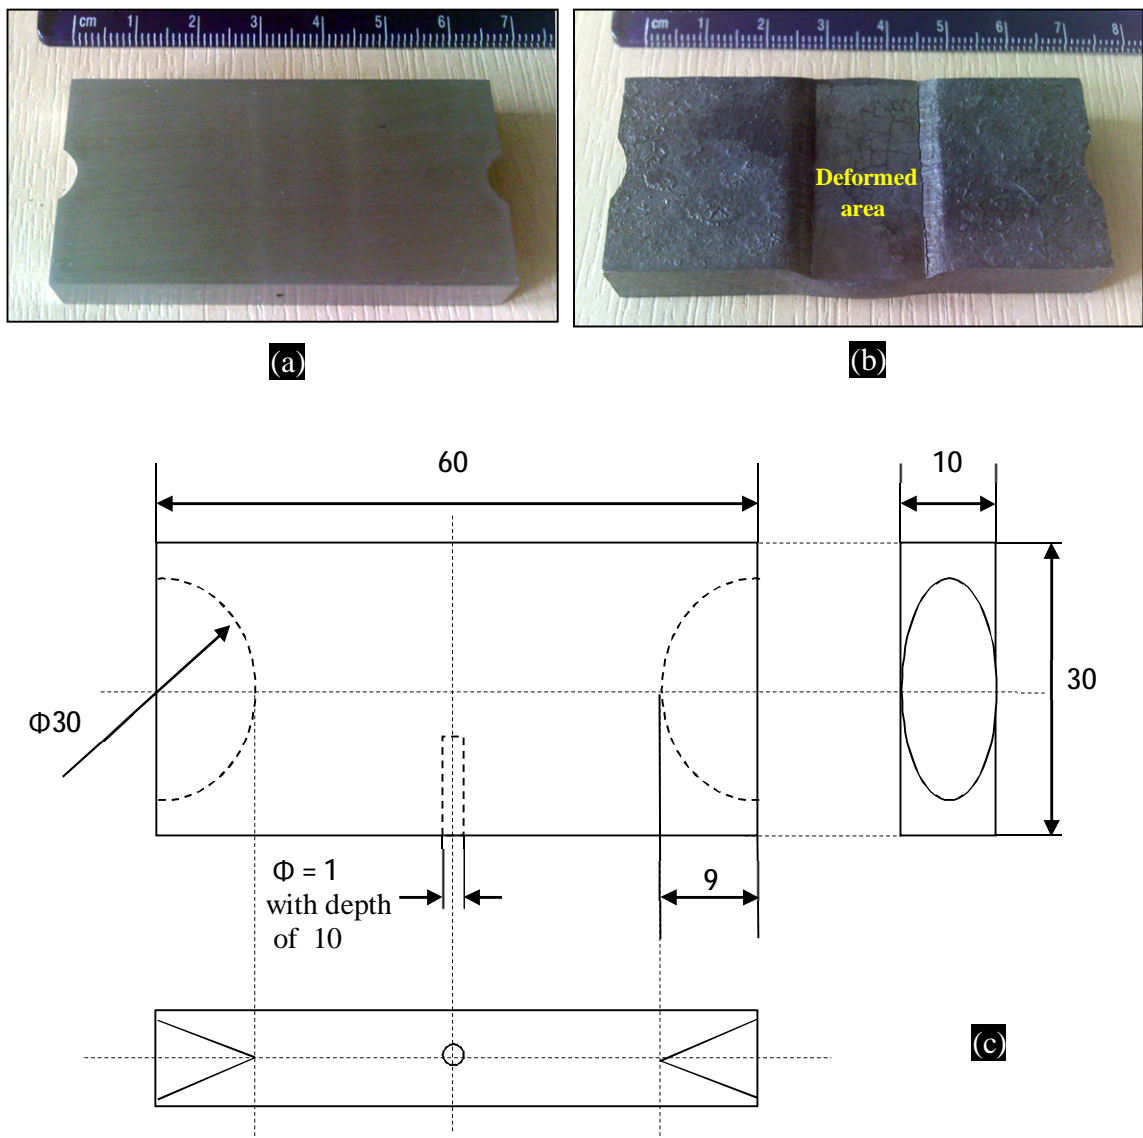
, Typical PSC standard specimen, (a) and (b) Pre and post deformation, respectively, (c) Sketch of PSC standard specimen with relevant dimensions (mm).
